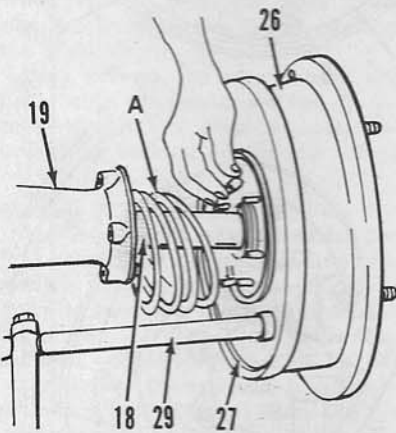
Wheel axle shaft and brake assembly. Shims (A) control axle shaft end play.
